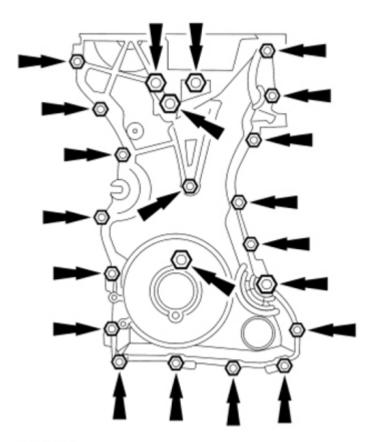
Locating Bolts And CKP Sensor Courtesy of FORD MOTOR CO.
